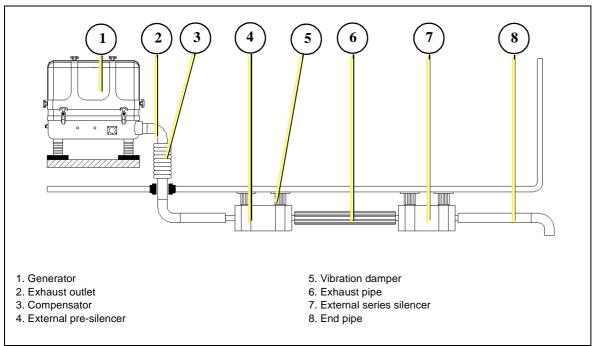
Exhaust connection for mounting below the vehicle
